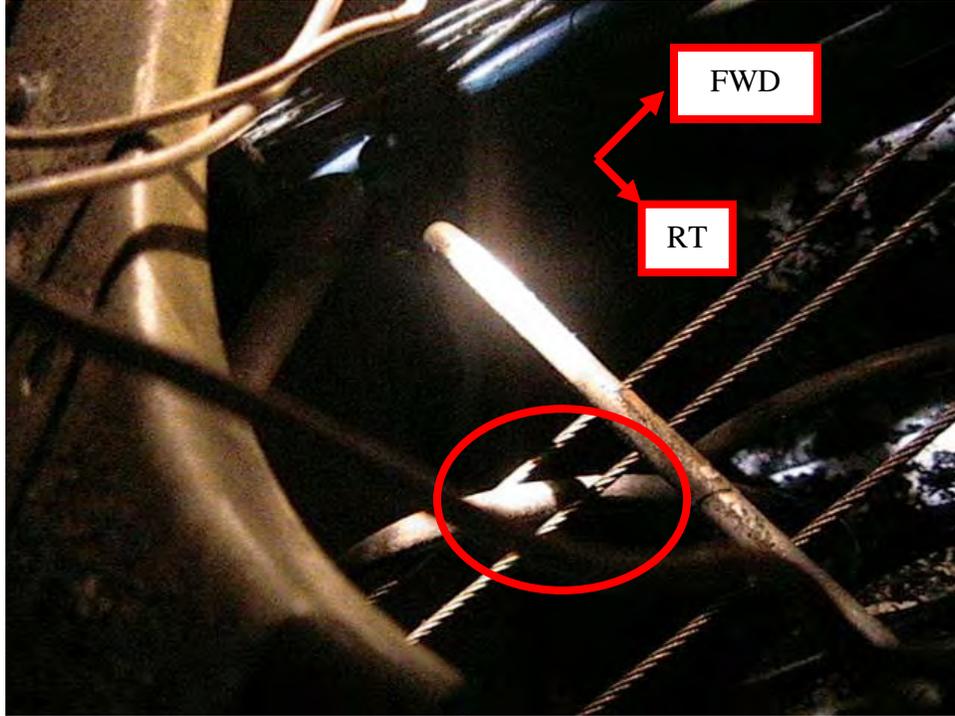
Chafing of a Coaxial Cable by Trim Tab Cables FS 84, WL 17, and BL 0
